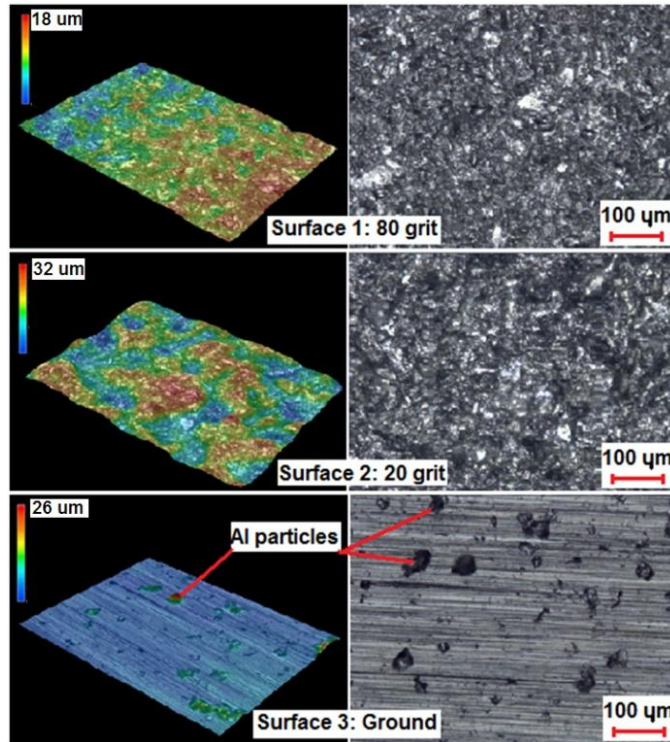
Post-spray Invar Surface Morphology (SST-5001 Aluminum, Set 1) on Three Dimension Topographical Mould Surface(left) and Top View of Mould Surface(right)
